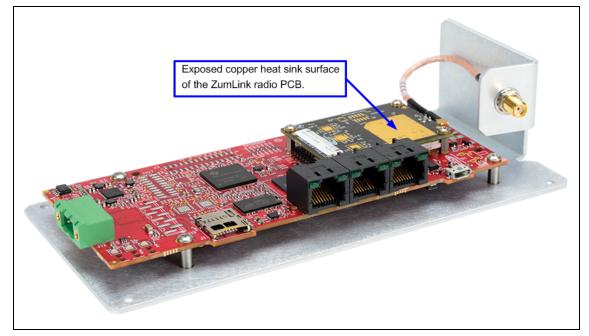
Exposed copper heat sink surface of the ZumLink Z9-P radio PCB.
